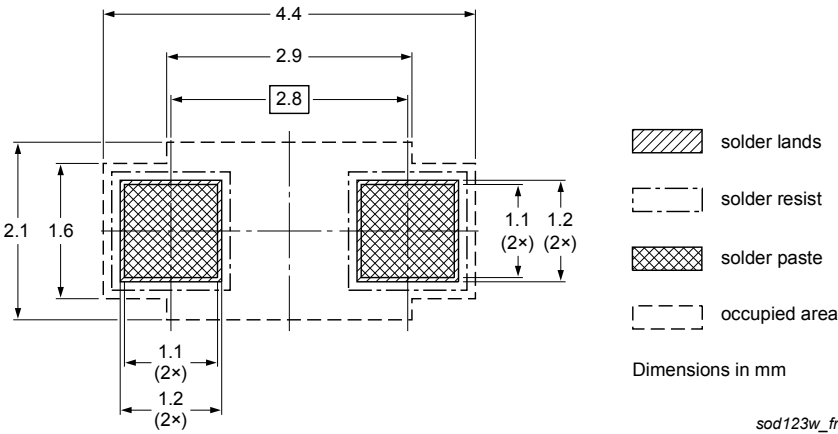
Reflow soldering footprint for CFP3 (SOD123W)
